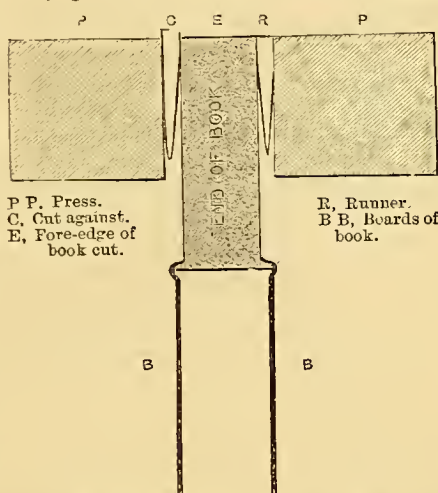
SECTION OF CUTTING PRESS, SHOWING CUTTING OF FORE-EDGE OF BOOK.
